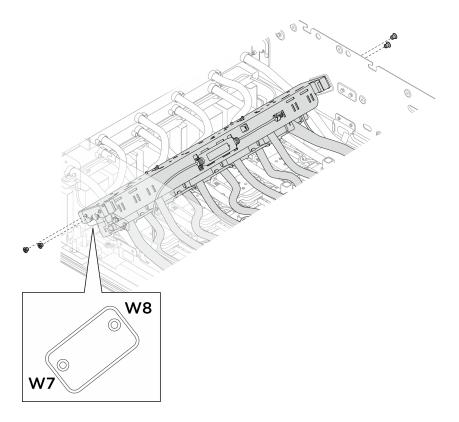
Installing the rear H100/H200 GPU cold plate module manifold
